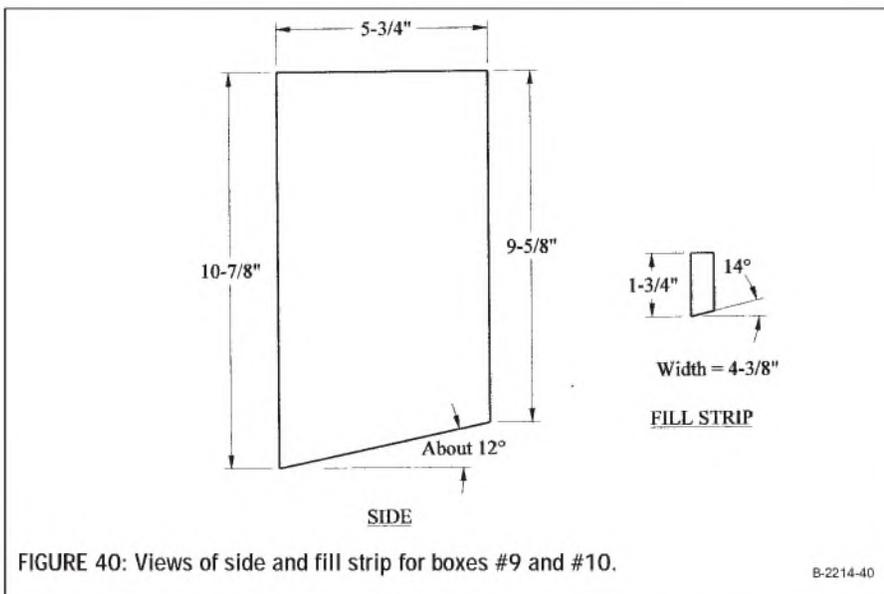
Views of side and fill strip for boxes #9 and #10.
